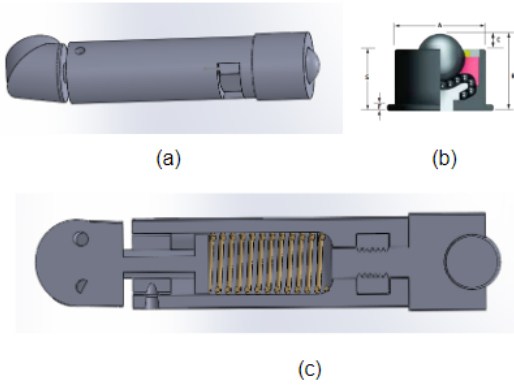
(a) A CAD model of one spring-loaded support. (b) Rollers used for the support. (c) Cross-sectional view showing spring and piston inside the support.
